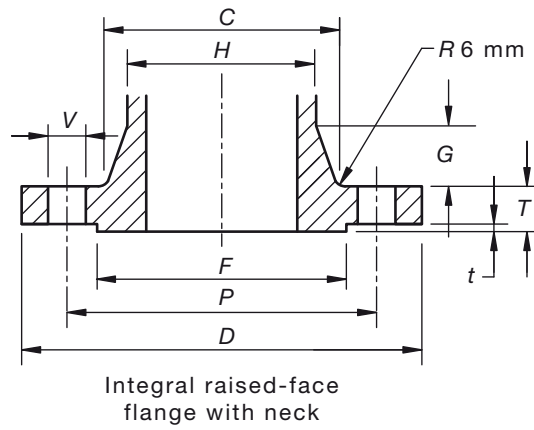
(in part) DIMENSIONS FOR DUCTILE CAST IRON FLANGES—PN 16
